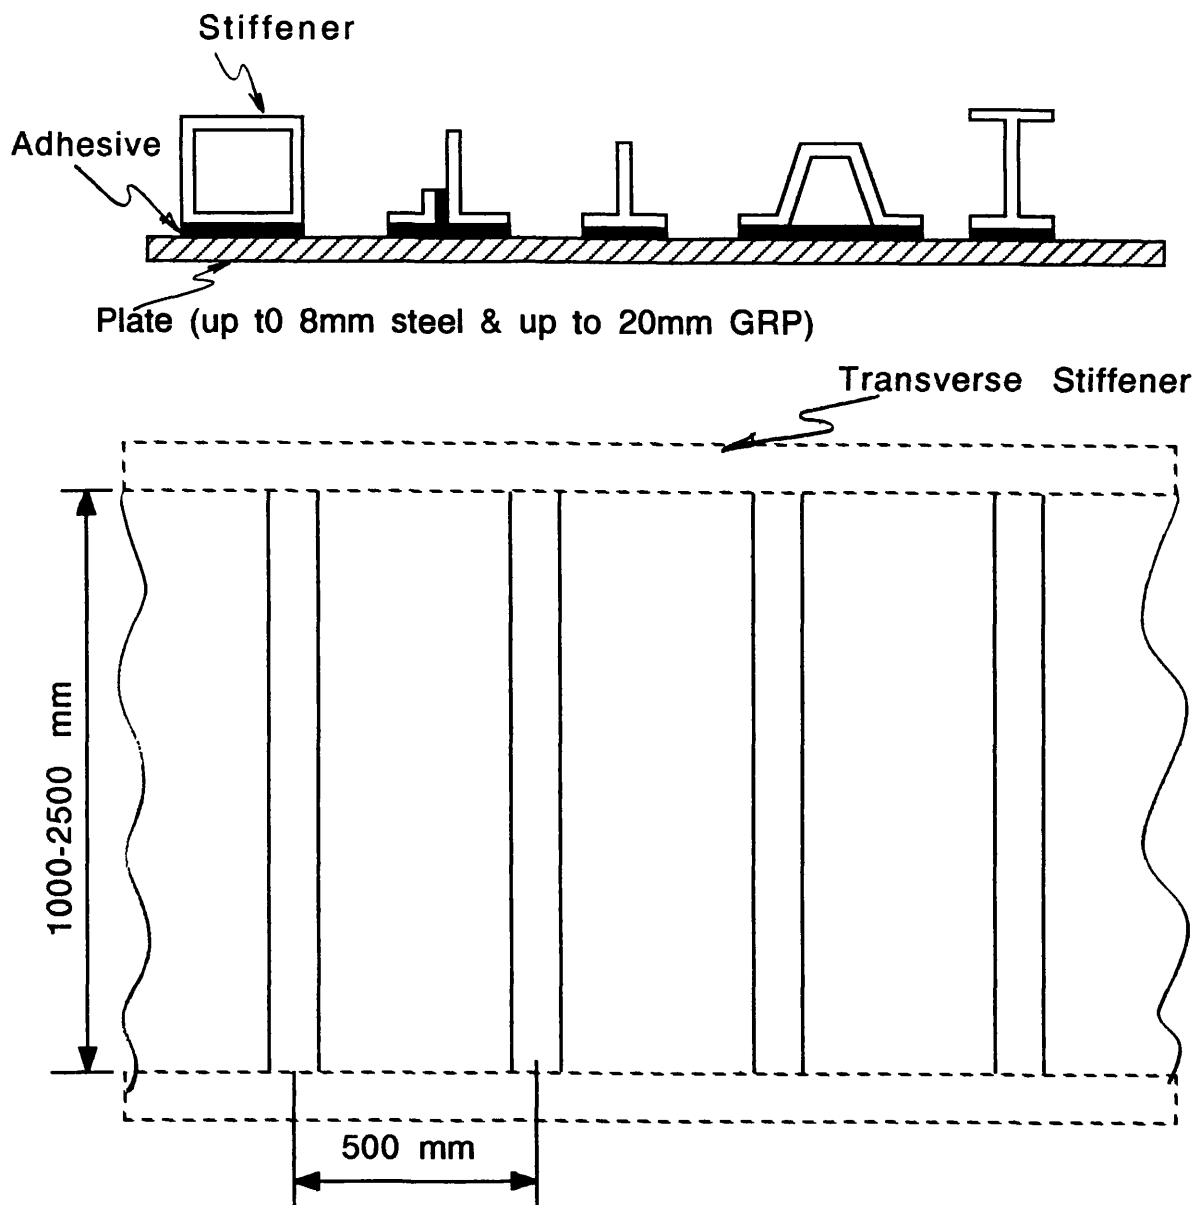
POSSIBLE BONDED STIFFENER FOR STRUCTURAL PANEL
